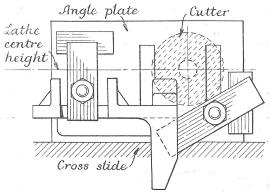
Method of setting up for machining the valve gear frame lugs.
